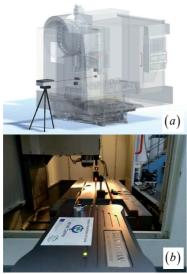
(a) Small Machine Tools - MCV 754QUICK. (b) Measurement on Small MT.
